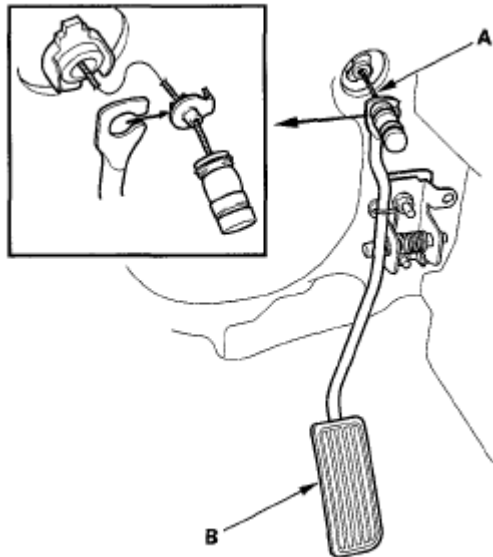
Identifying Throttle Cable And Accelerator Pedal
